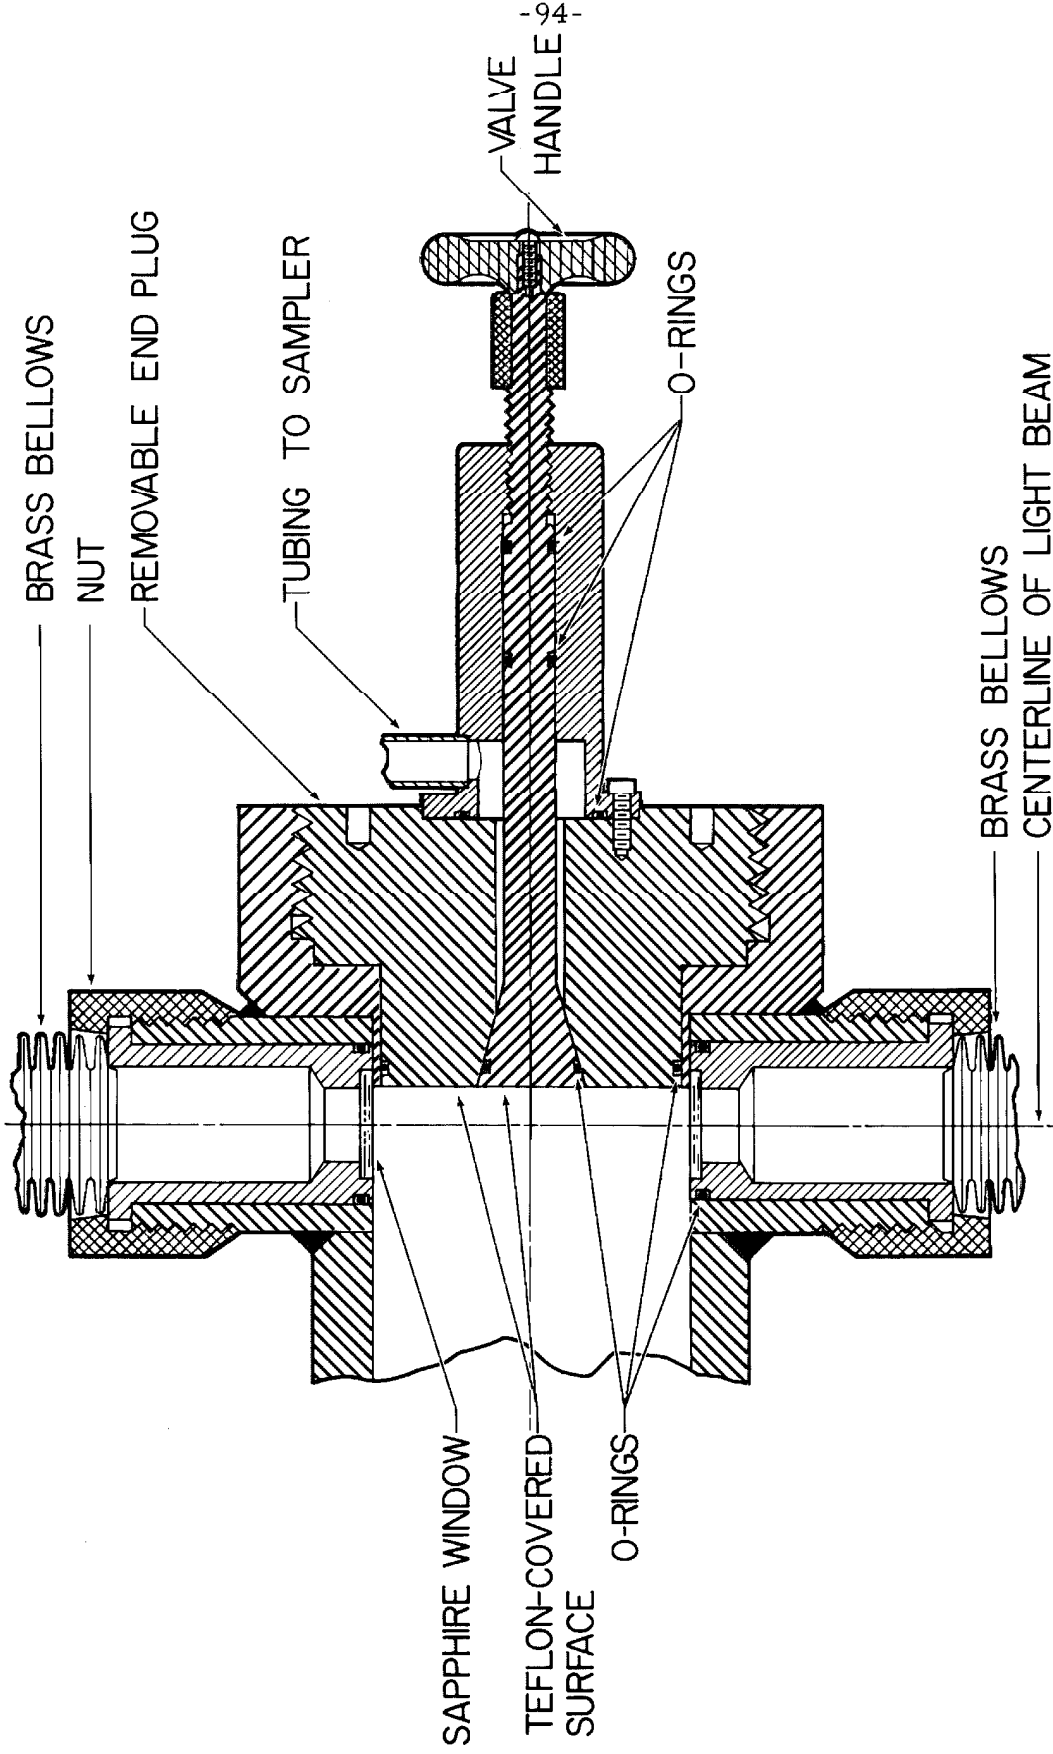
Cross section of shock tube test section showing flush windows in sides and flush poppet valve at end. The valve was opened for flushing the shock tube with H_2O -Ar gas mixture but was closed before firing the shock tube (top view; half size).
